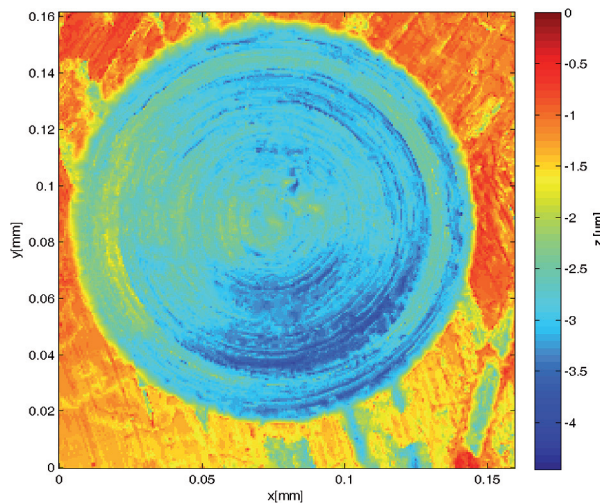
Surface topography after tool-workpiece contact for speed of 21 000 RPM and 0.127 mm tool diameter
